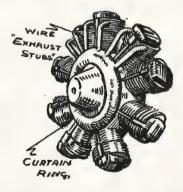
Cast model engine with "curtain ring" exhaust manifold and wire "branch pipes" fitted to three cylinders
